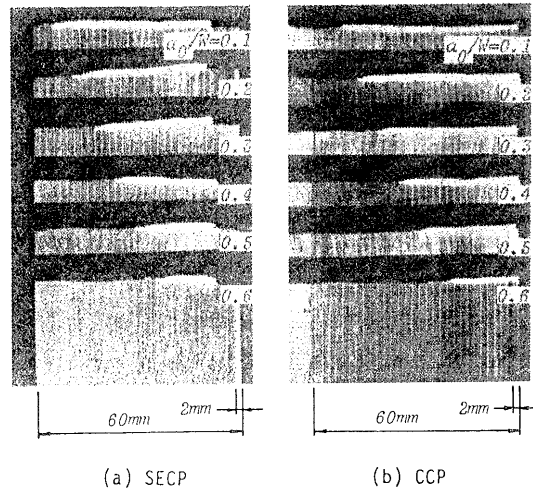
Photographs of post-fracture surfaces taken from perpendicular direction to plate
